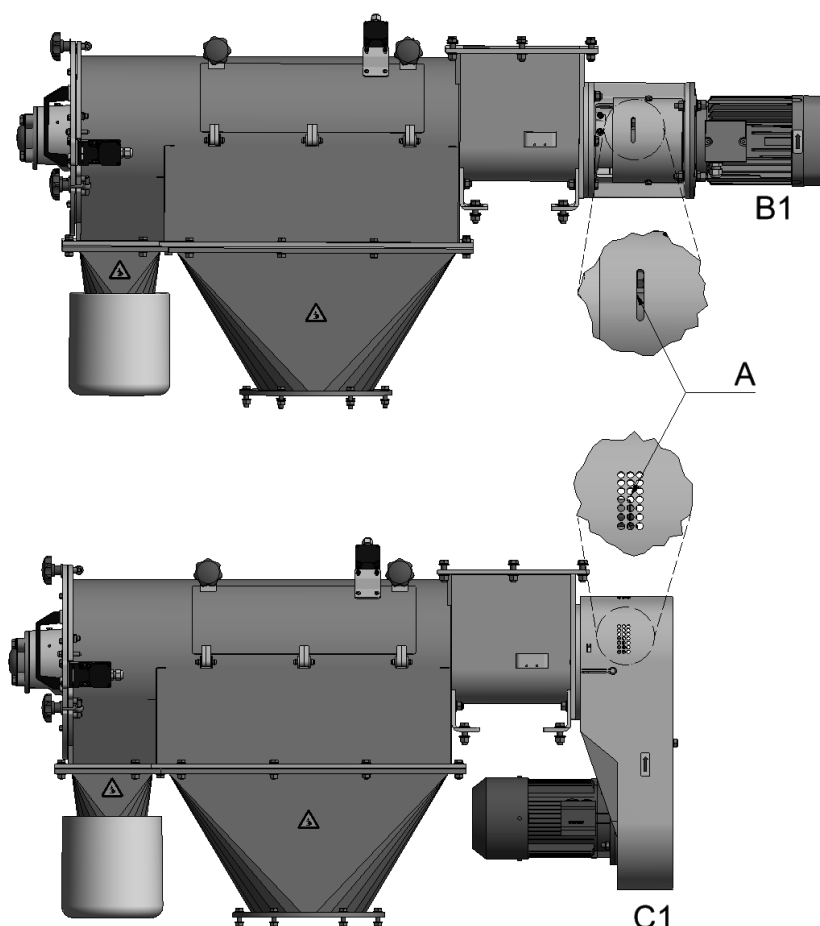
Rotor fuse, drive side (cheese head screw with hexagon socket behind protective plate) / Design B1 and C1
